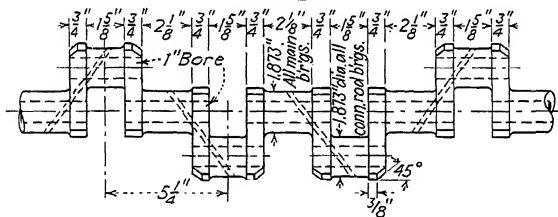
Four-cylinder in-line crankshaft. Tank-70, five main bearings.
